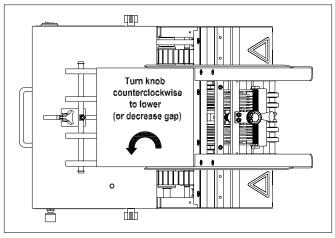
Adjusting Gate Assembly for Correct Gap
